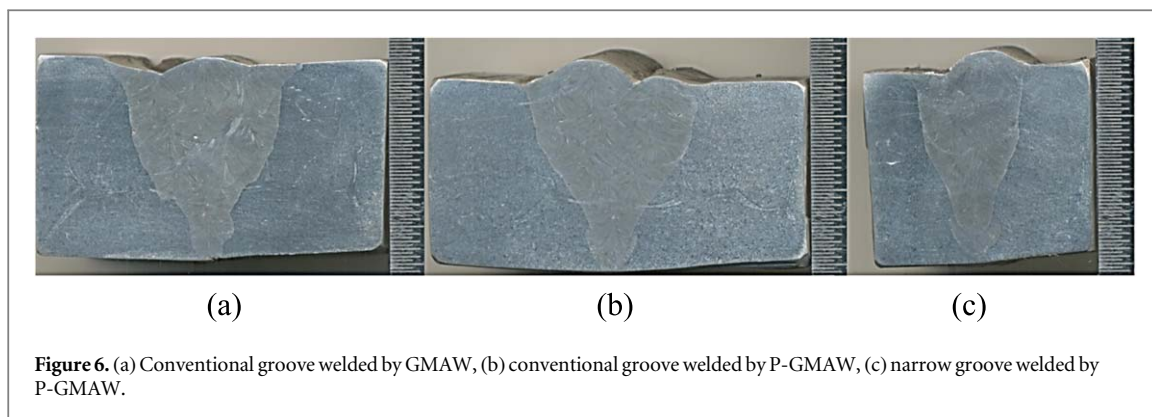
(a) Conventional groove welded by GMAW, (b) conventional groove welded by P-GMAW, (c) narrow groove welded by P-GMAW.
